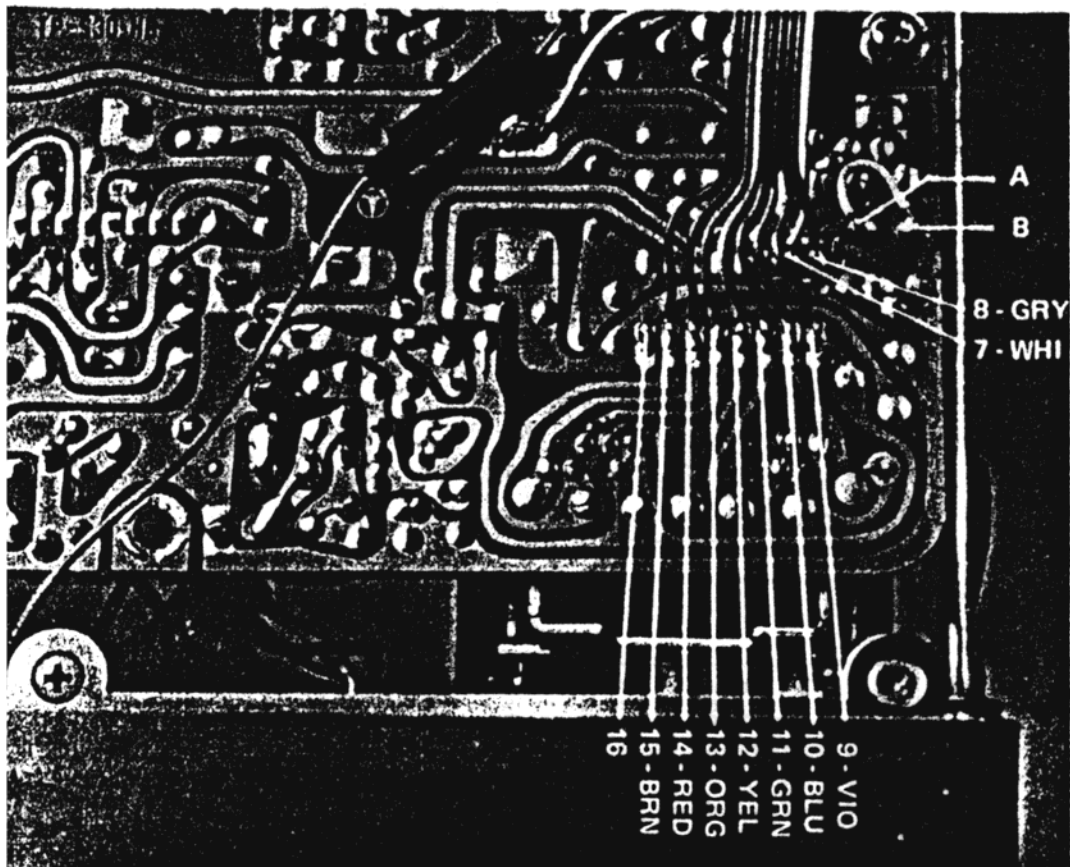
INSTALLATION OF CABLE ASSEMBLY
